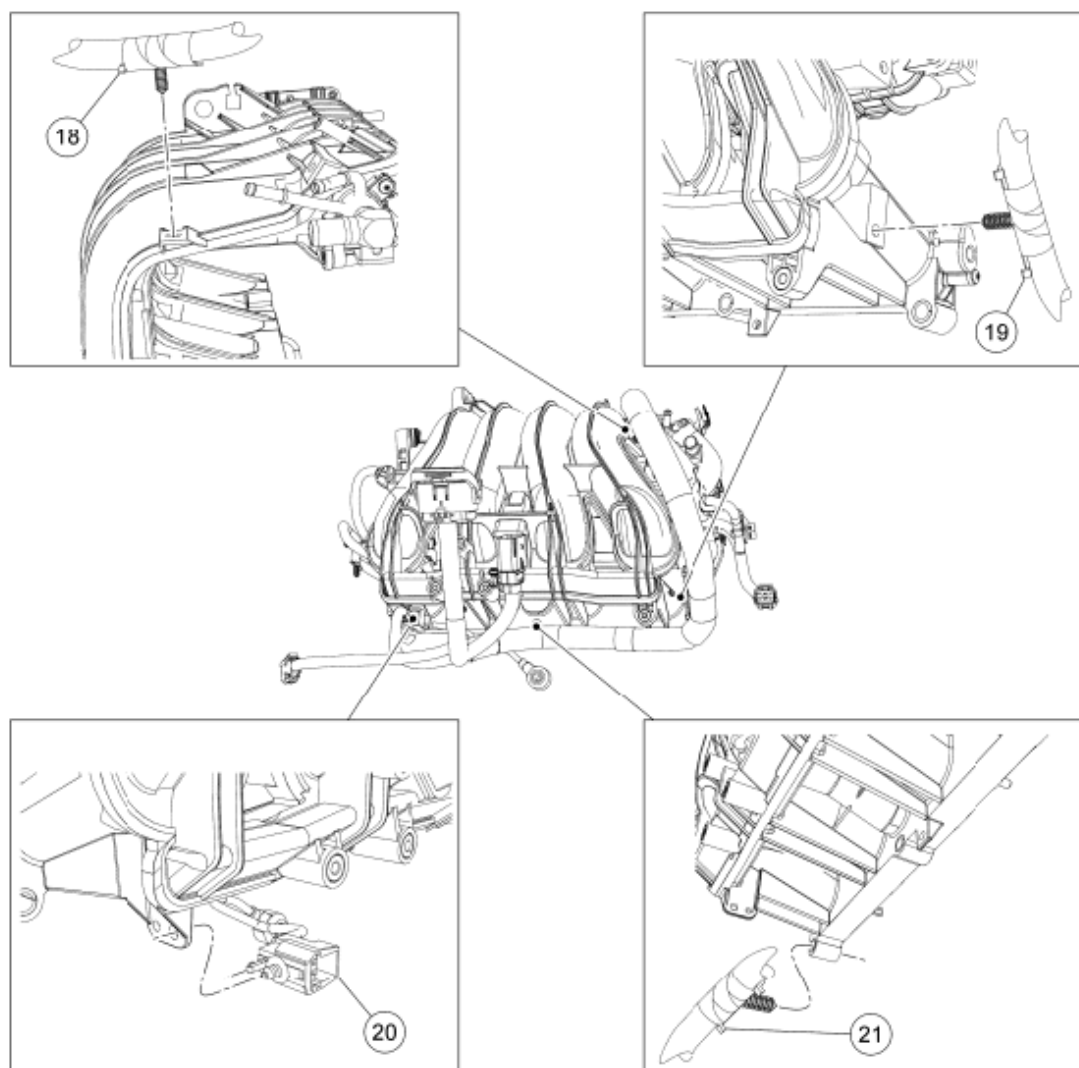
Identifying Intake Manifold With Torque Specifications - Rear Connections
